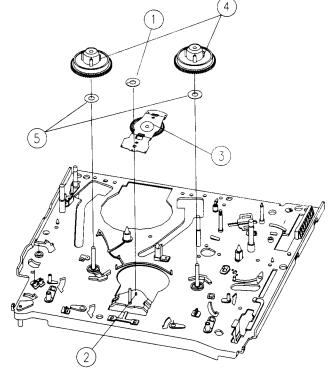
IDLER PLATE TOTAL ASS'Y & S/T REEL TABLES REMOVAL
